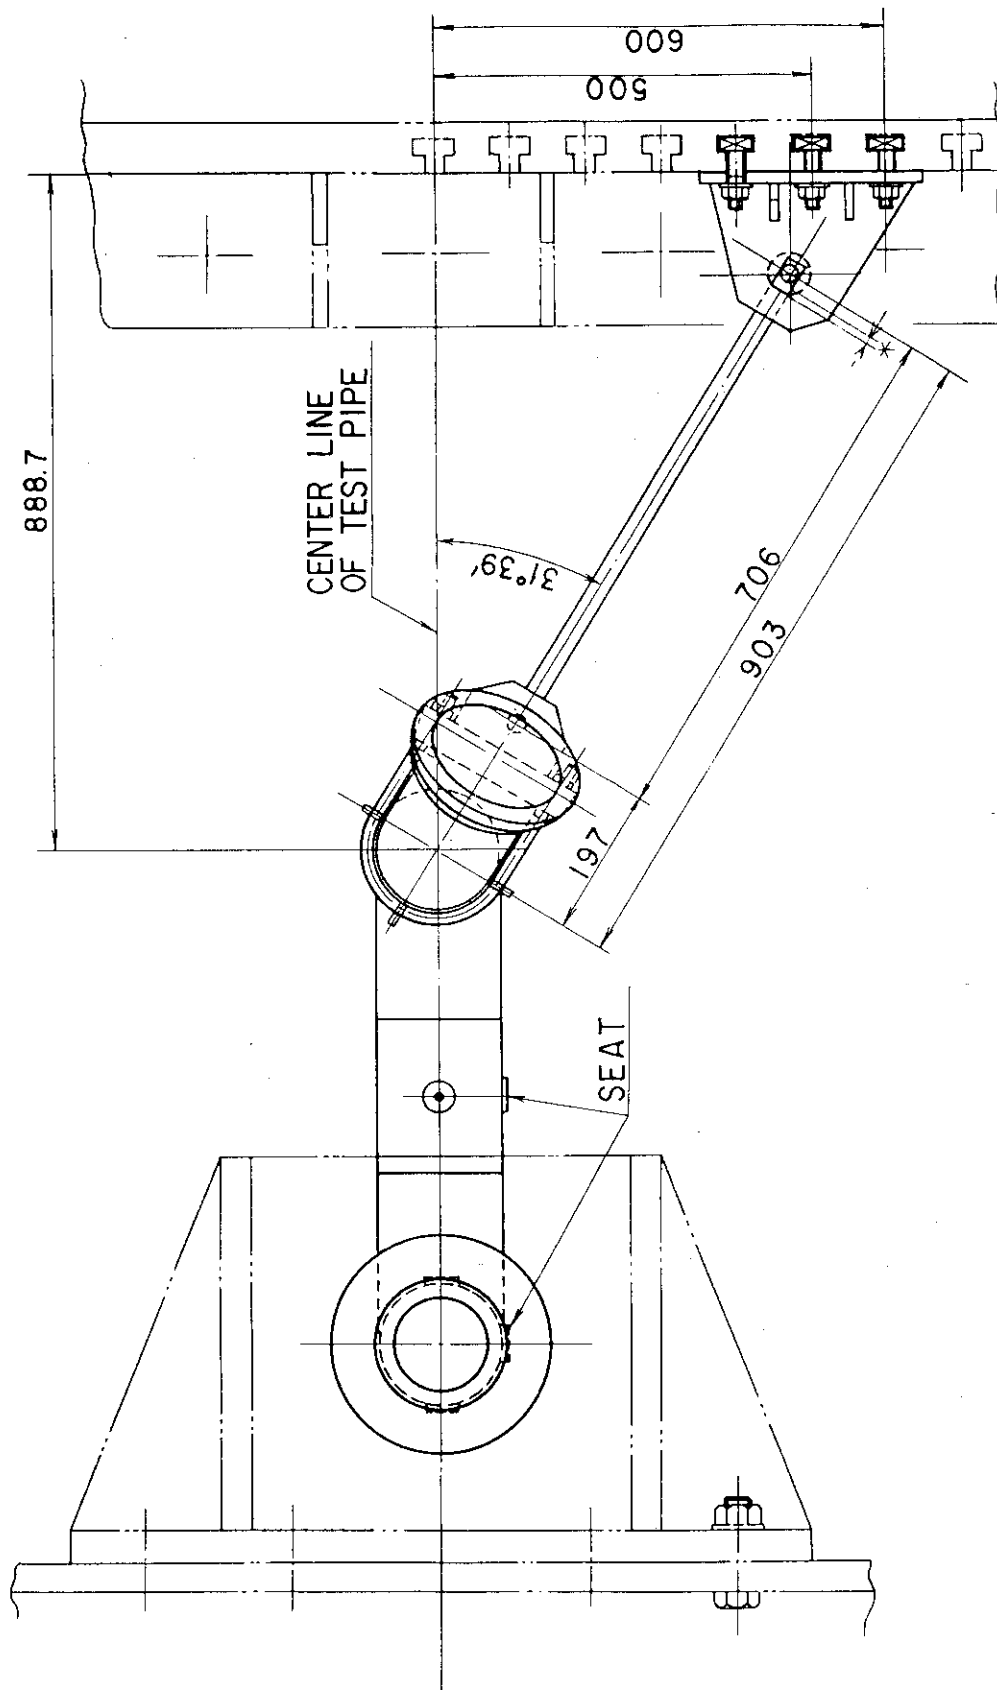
Detail assemblage of the test pipe and the restraints
